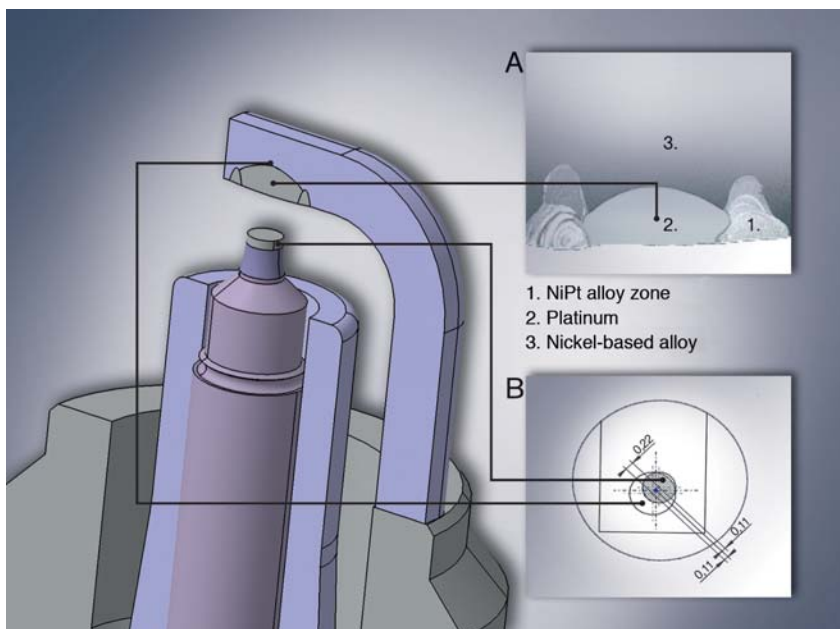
Formation of the alloy zone in the border area of the noble metal cladding in laser welding (A); minimum 92 % coverage of the noble metal surfaces based on optimized manufacturing process (B)
